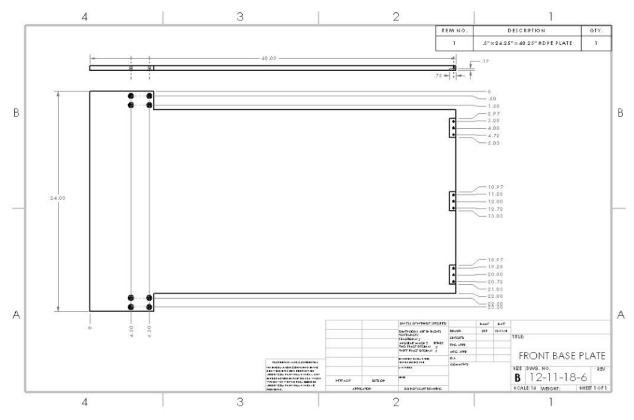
Detailed drawing of the Front Base Plate (part 12-11-18-6).
